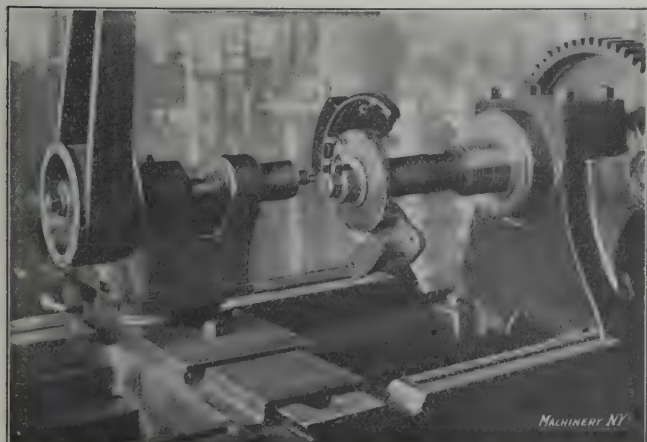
Milling Contact Spots on Countershaft Friction Parts
